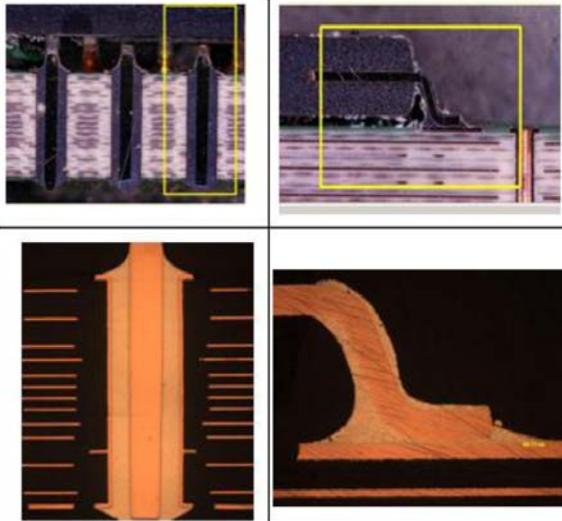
LTS solder configuration of pin PTH connector and surface mount gull wing IC
